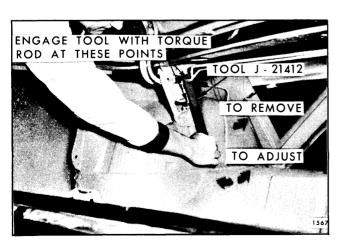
Rear Compartment Torque Rod Adjustment - "X-27,69" Styles
